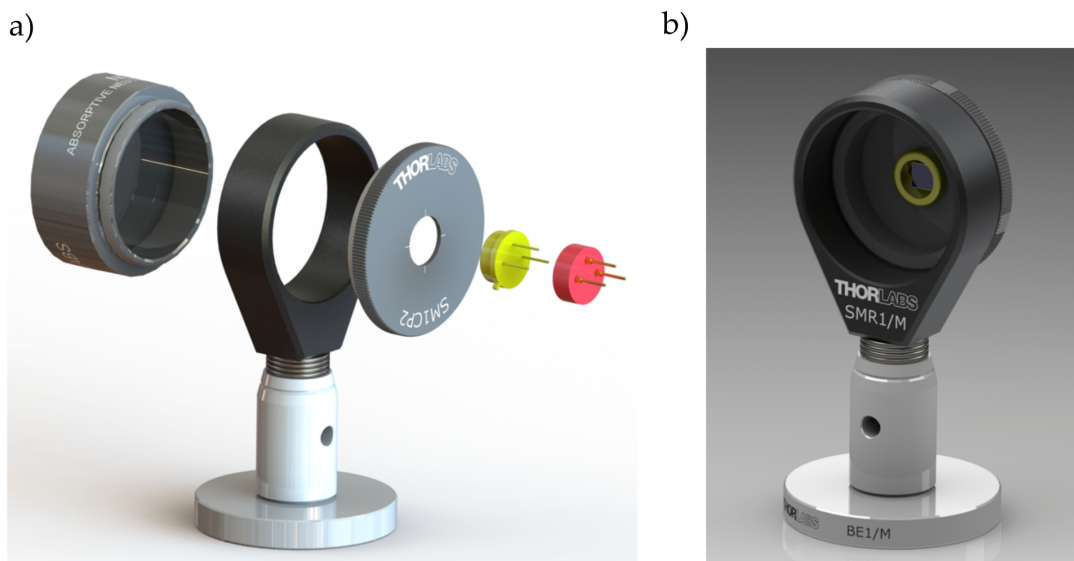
Exploded view a) and fully assembly b) photodiode with standard Thorlabs components.
